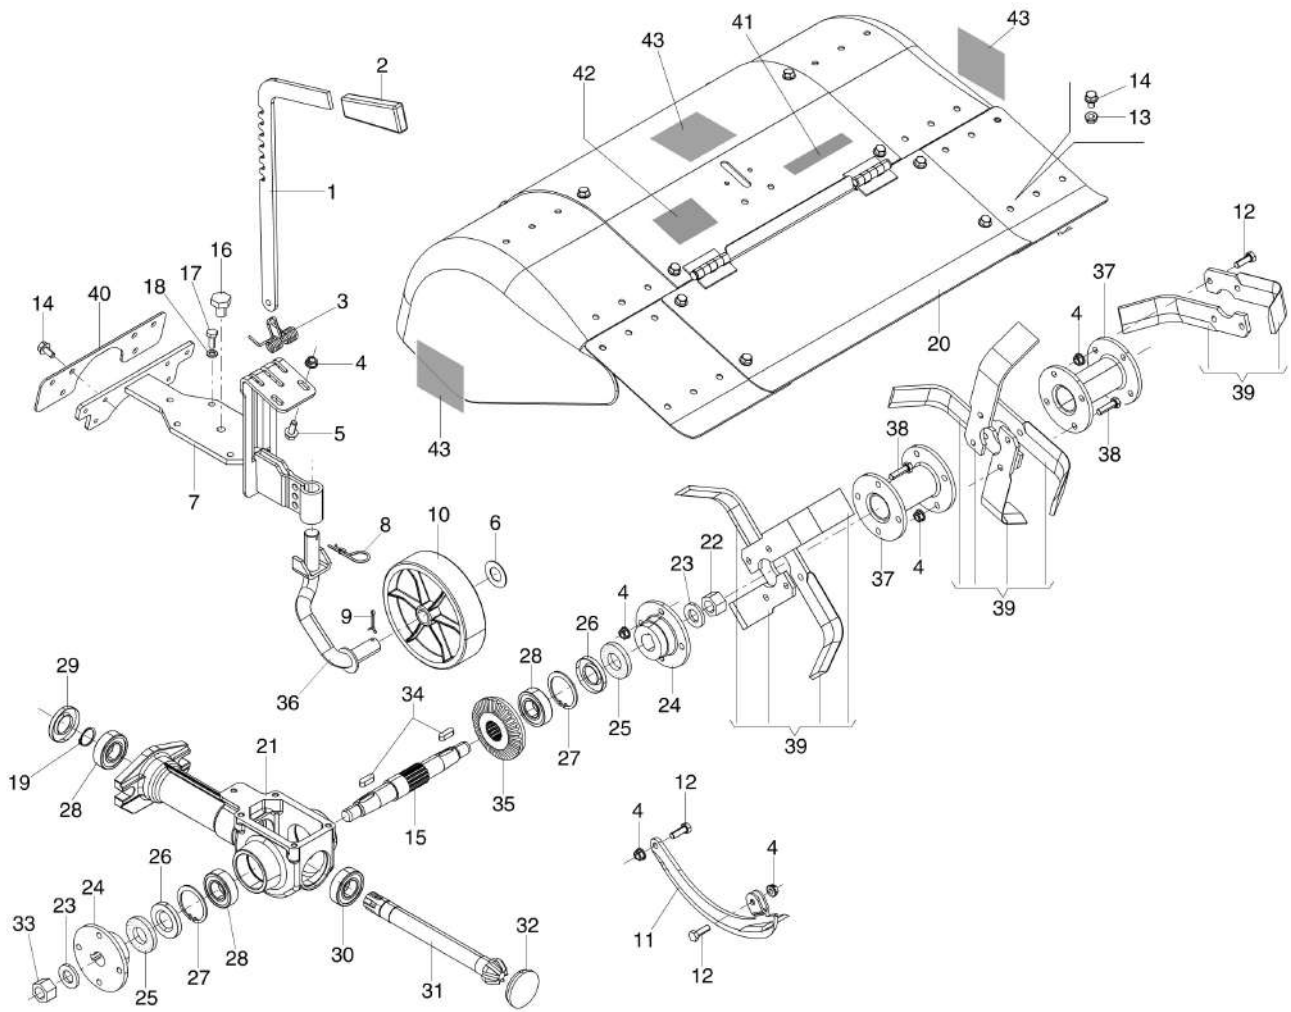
cm rotor with adjustable cowling and fixed connection 69219069
